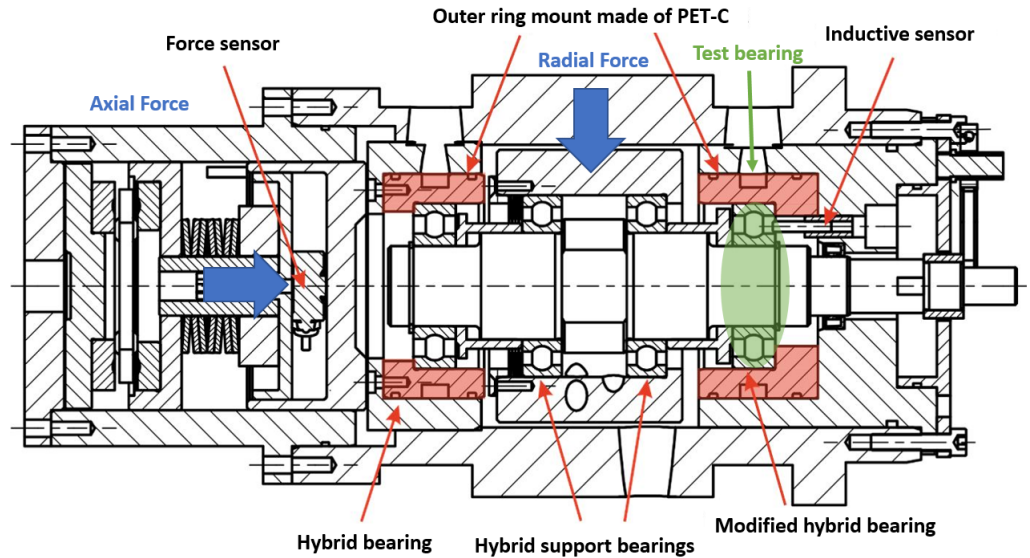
Universal test rig modified to investigate electrical effects in bearings.
